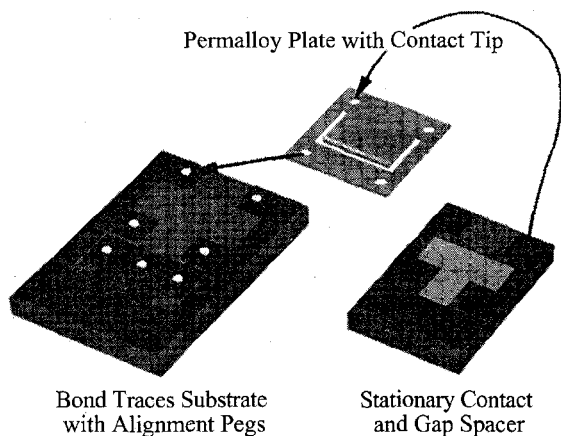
The relay fabrication is completed with the assembly of the three micromachined pieces. Pegs and holes on the parts ensure simple and accurate alignment of the parts.
